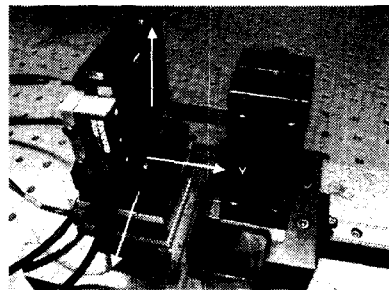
3-axis positioning system using miniaturized stages and tool holder
